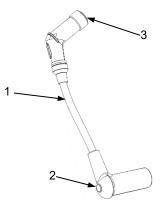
Spark Plug Wire components: Insulated Wire (1), Spark Plug Boot (2), Ignition Coil Boot (3)
